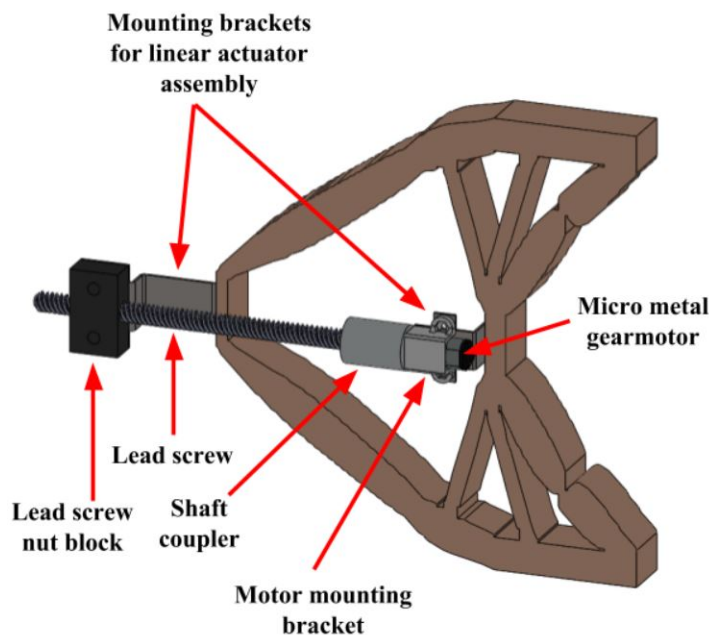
CAD model of gripper #2 with mounted linear actuator.
